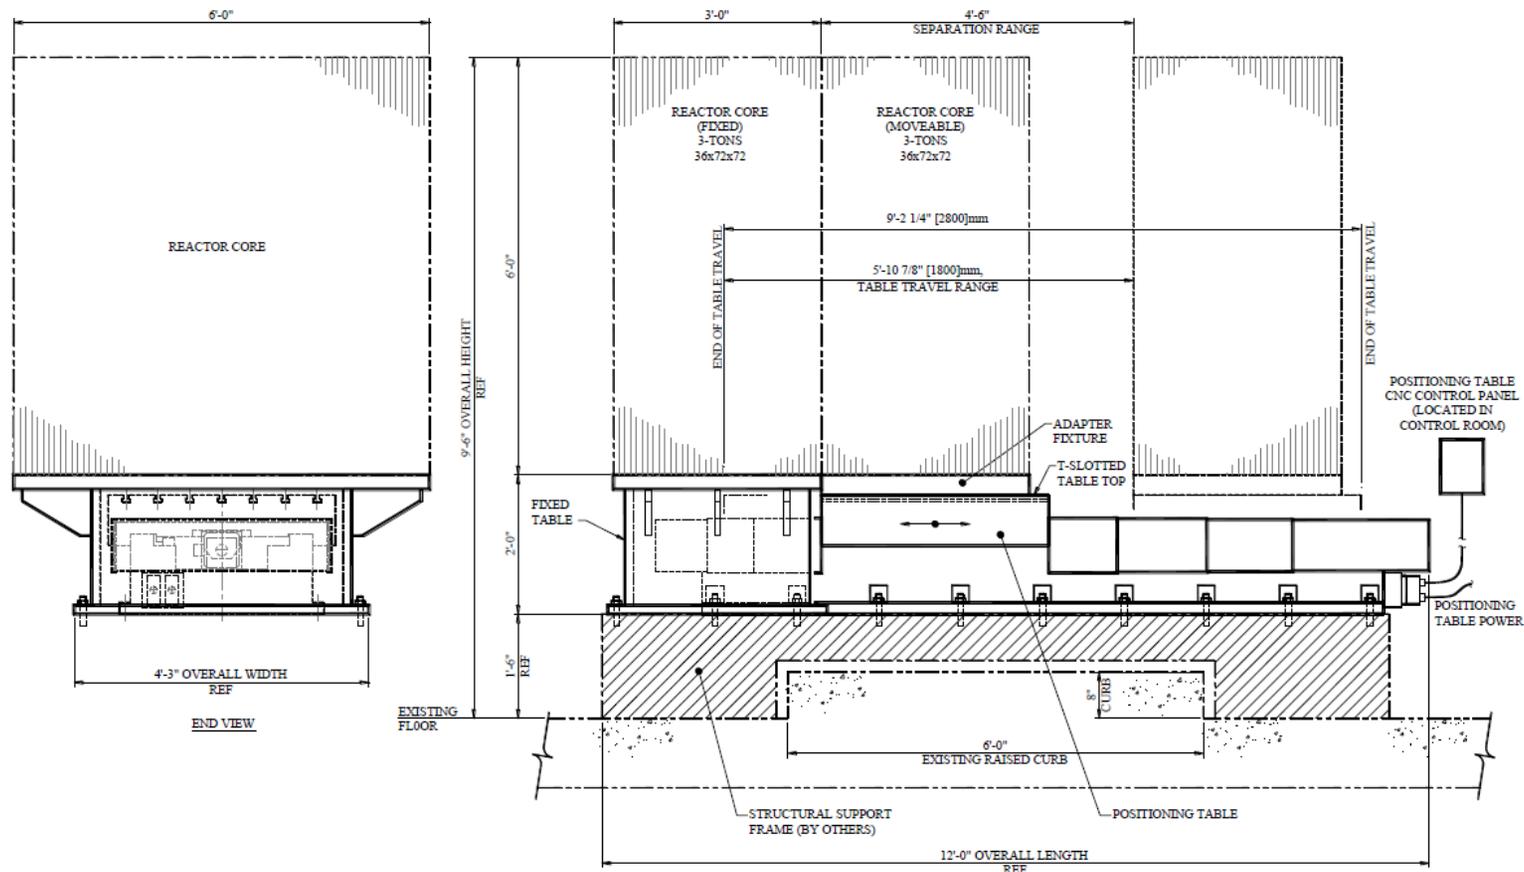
Schematic of Drive Arrangement for Split-Table Machine.
